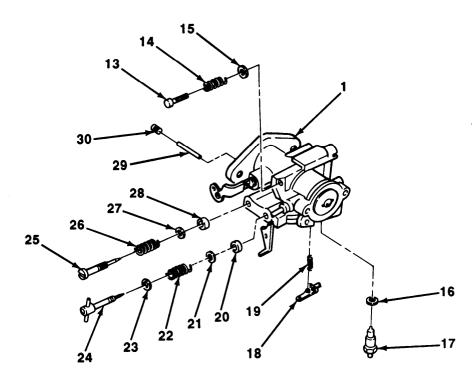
Carburetor Adjustment Screw, Idle Adjuster Screw, Regulating Screw, Inlet Needle, and Inlet Control Lever Replacement.
